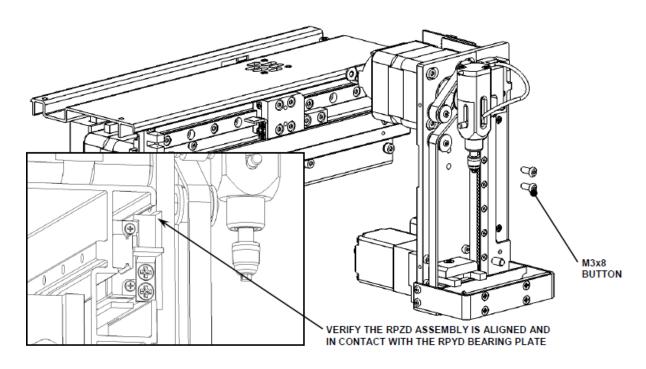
Removing the Reagent Pipettor Z Drive Assembly
